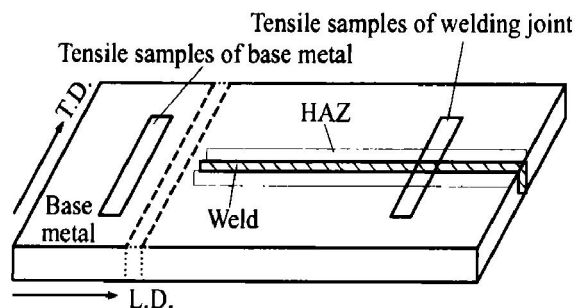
Schematic of 2195 alloy welding joint
